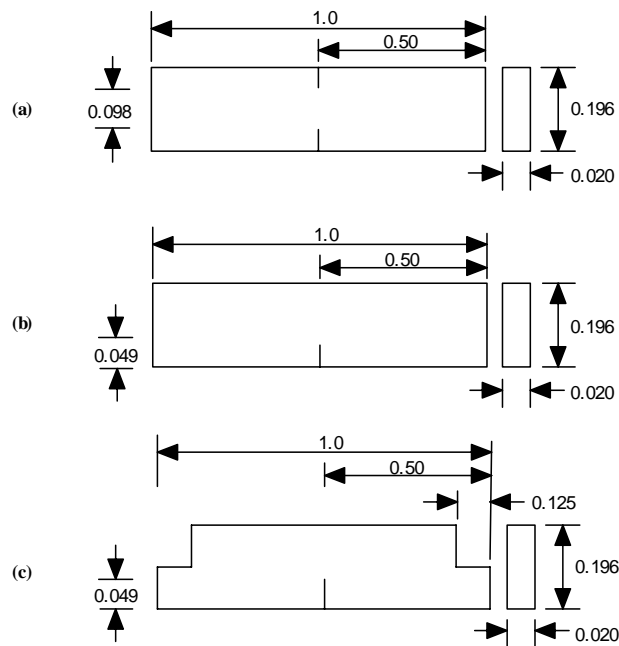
Dimensions (inches) of candidate fracture-mechanics specimens, a) double edge notch, b) single edge notch, and c) modified grip single edge notch test specimens.
